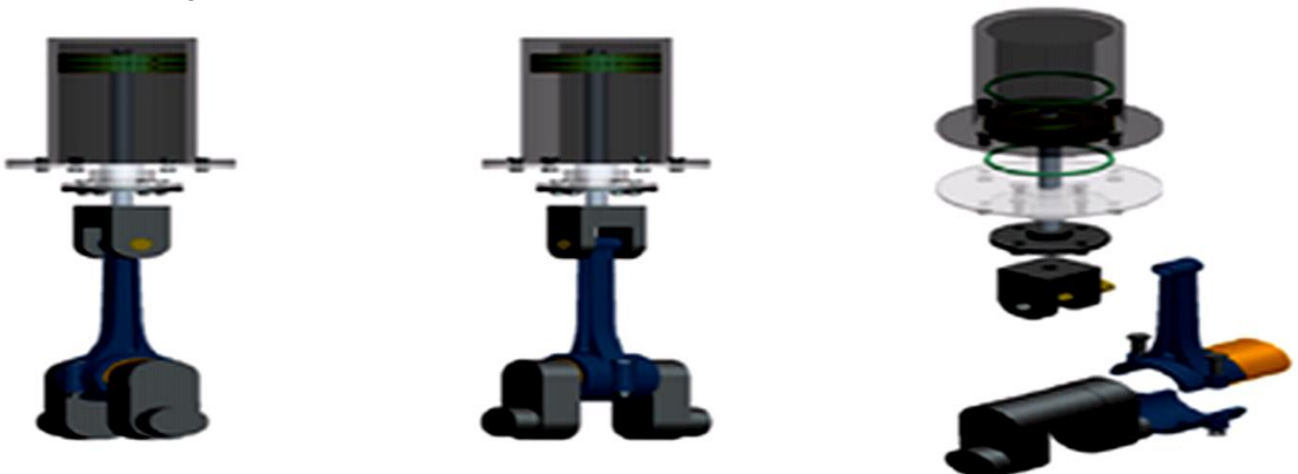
CAD model of double acting reciprocating compressor using Pro-E tool
